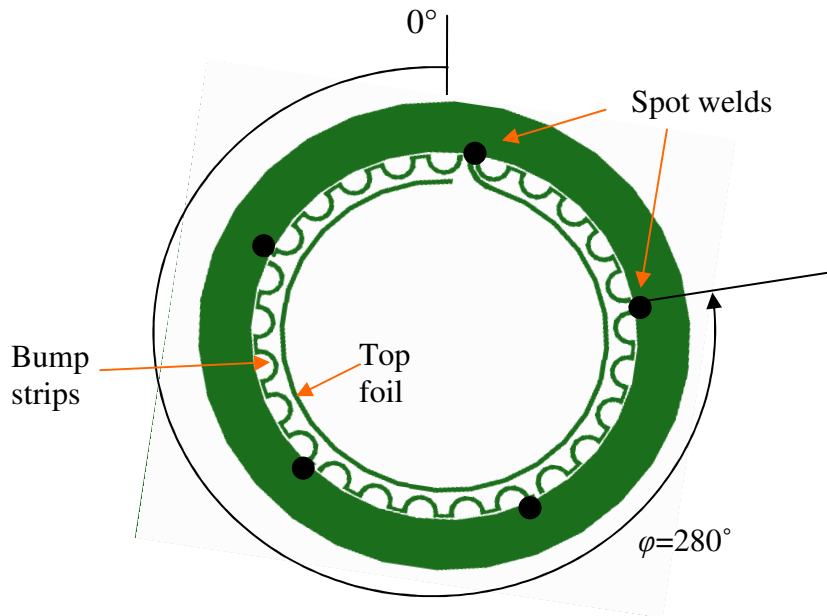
Schematic view of FB with bump strip spot weld locations every $\varphi=70^\circ$.
